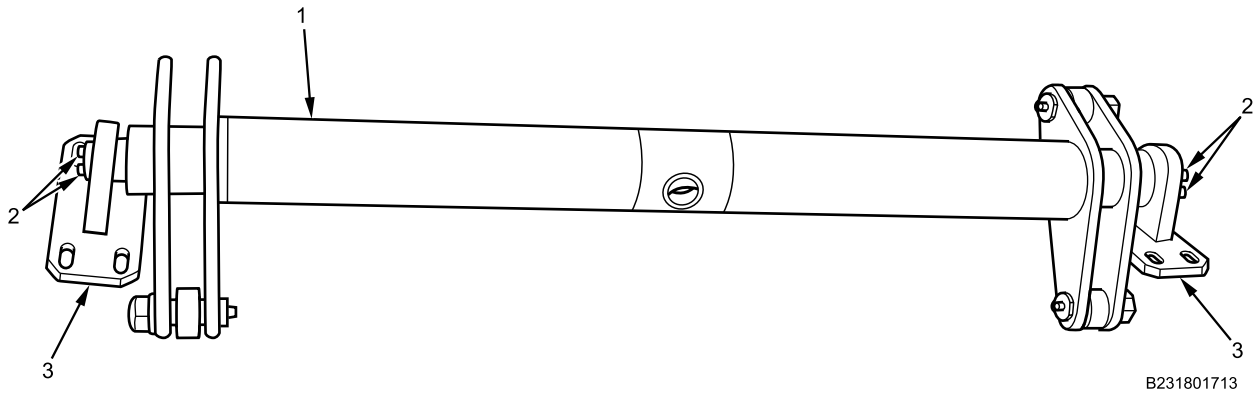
Rear Door Lock Assembly Removed from Vehicle.
